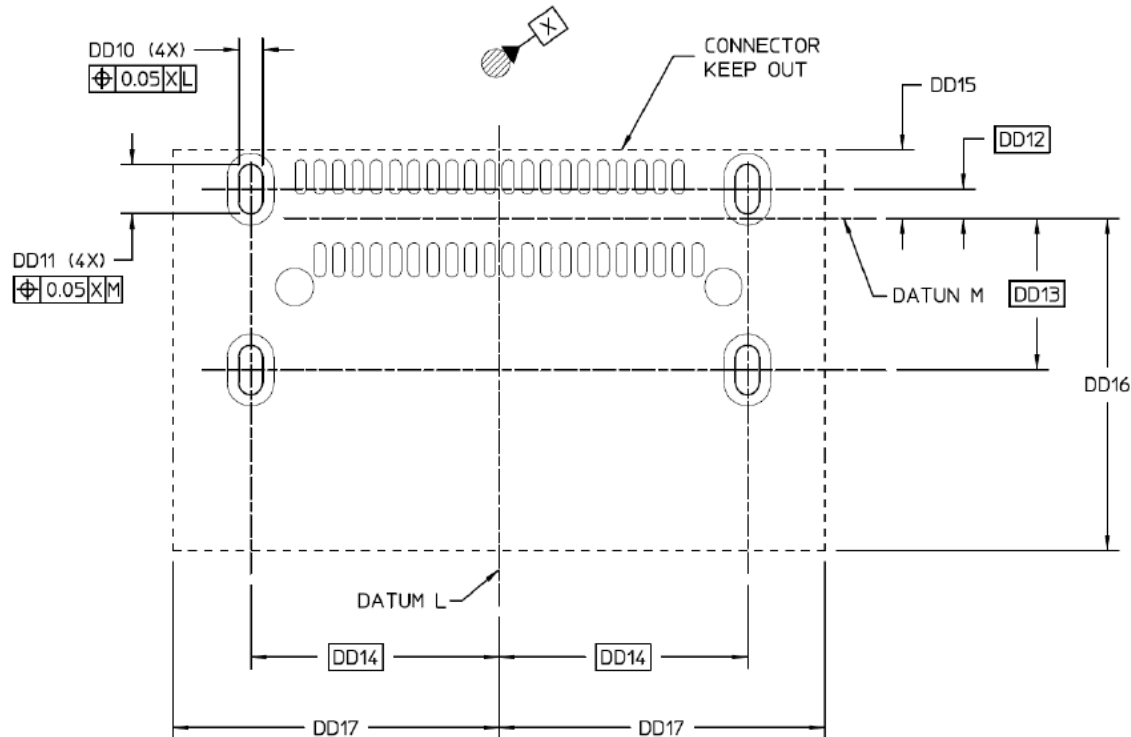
Example Through-Hole Footprint for Right-angle Connectors
